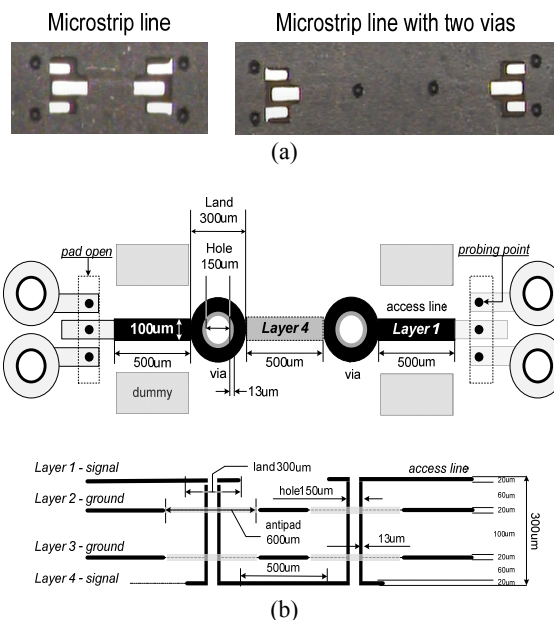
Test patterns. (a) Photograph, (b) Layout dimension and cross-section.
